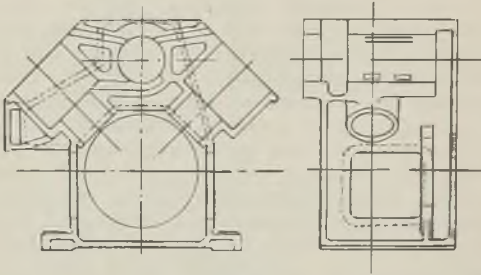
CYLINDER BLOCK FOR COMPRESSED-AIR ENGINE.
